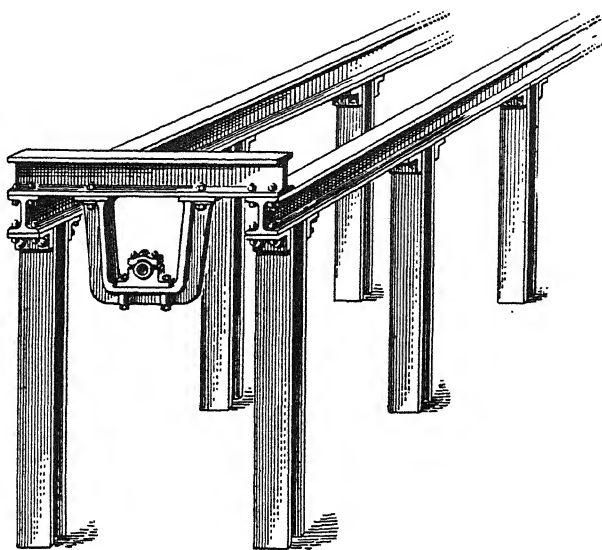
SHAFTING CARRIED ON STEEL JOIST WHEN IT IS NOT POSSIBLE TO USE THE WALL OR ROOF FOR SUPPORT
